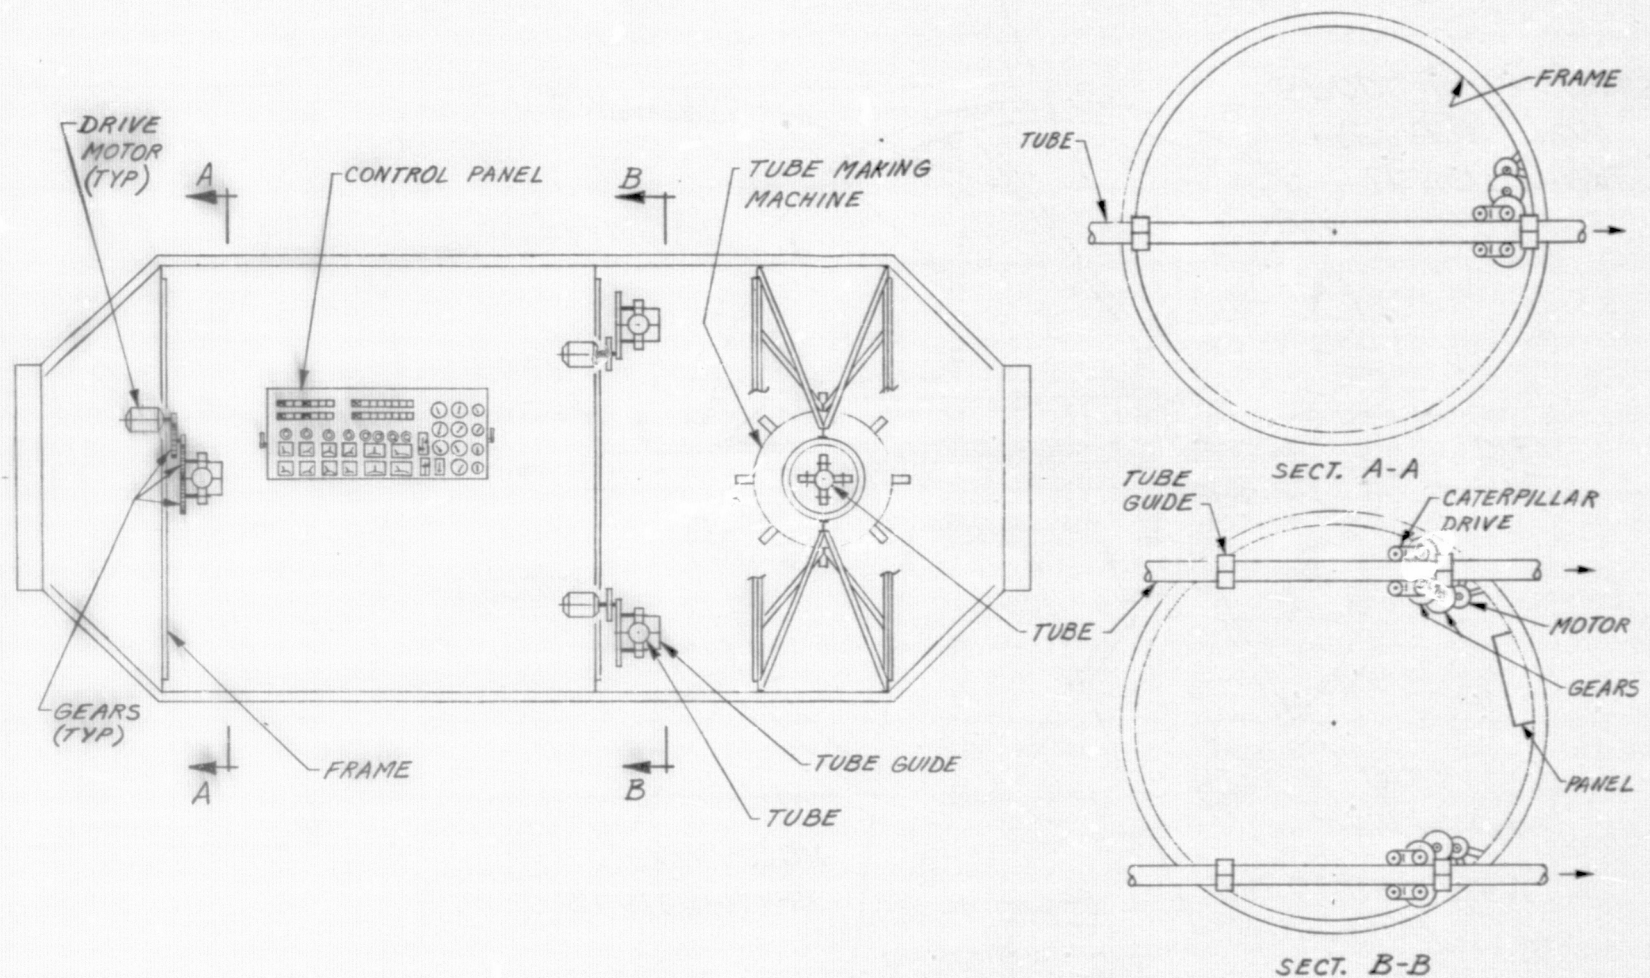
Inboard Profile - Beam and Tube Making Module
